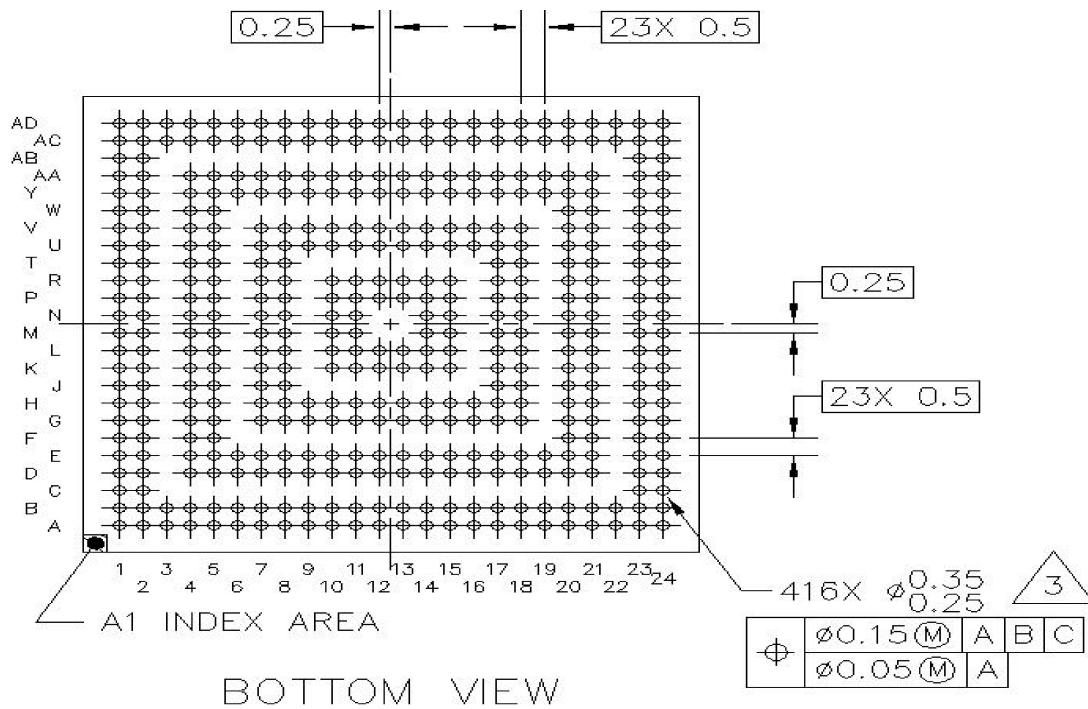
416 PoPBGA 13 x 13 mm Package Bottom View
